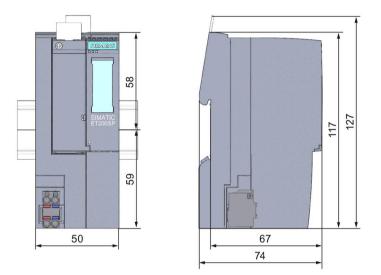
Dimension drawing of the IM 155-6 PN ST interface module (front and side view)
